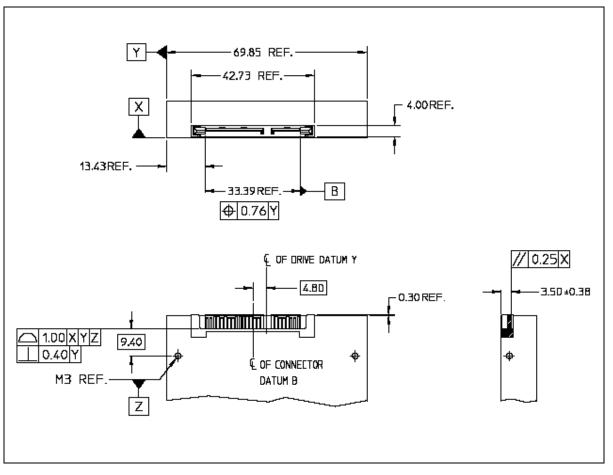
Device plug connector location on 2.5 inch bottom mounted device
